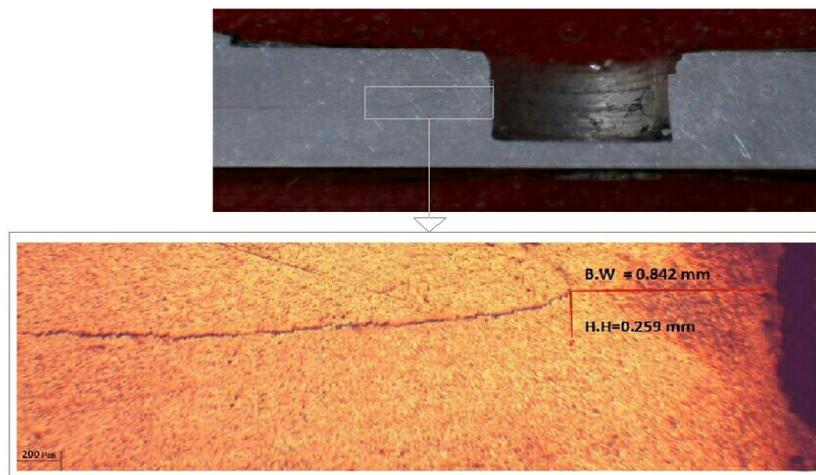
Macro- and microstructures of a friction stir spot weld made using triangular pin 800-rpm tool rotational speed.
